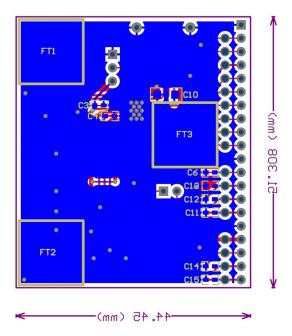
NCV7429 EVB PCB Bottom Composite Drawing (Bottom view)
